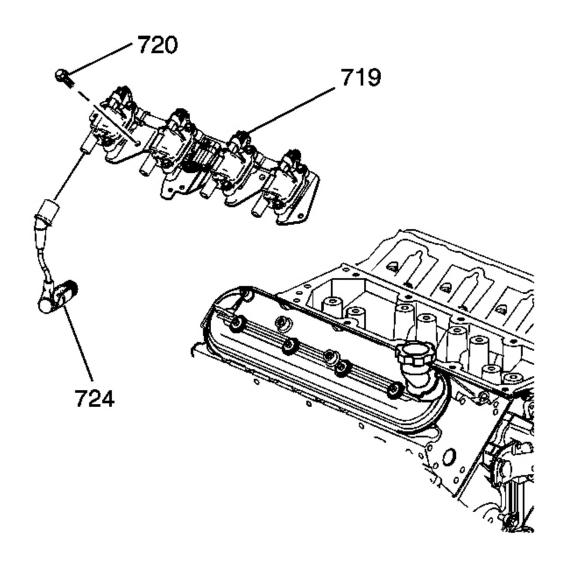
Ignition Coils & Bracket Courtesy of GENERAL MOTORS CORP.
